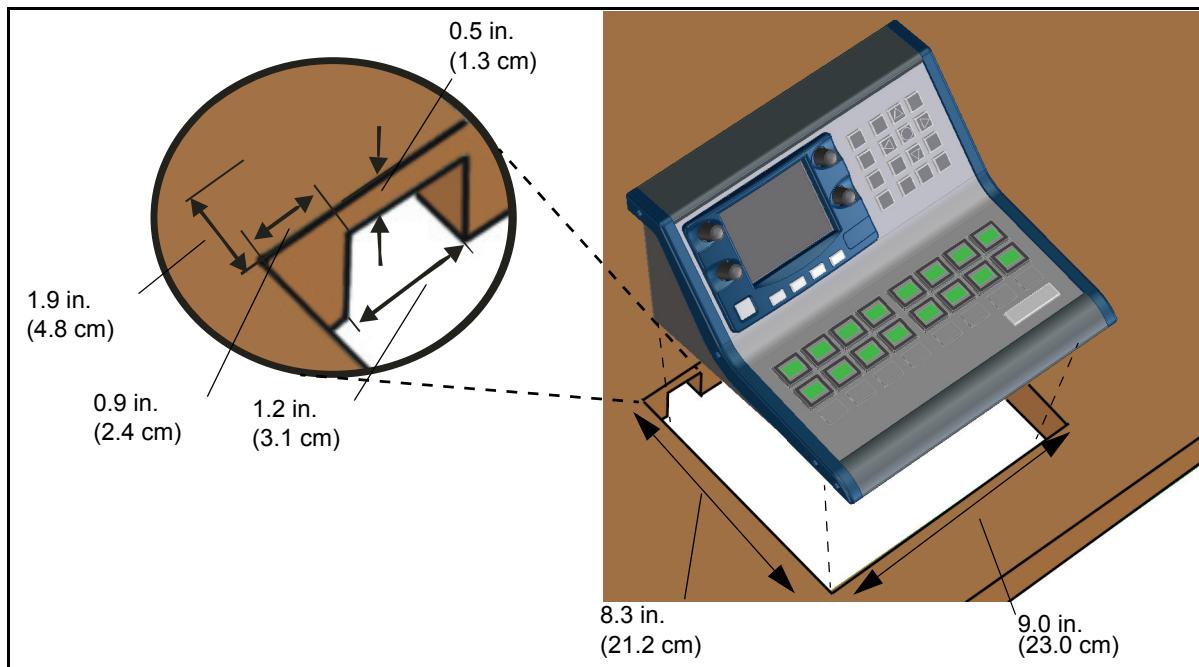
Mounting NUCLEUS-DM into the Cutout
